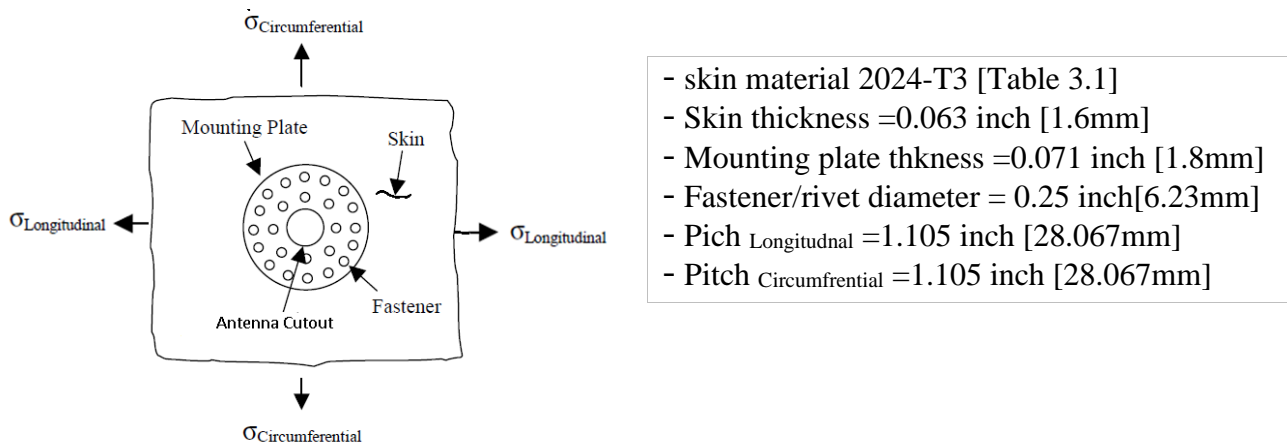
Rivets layout and determination of number of rivets for circular mounting plate-typical
